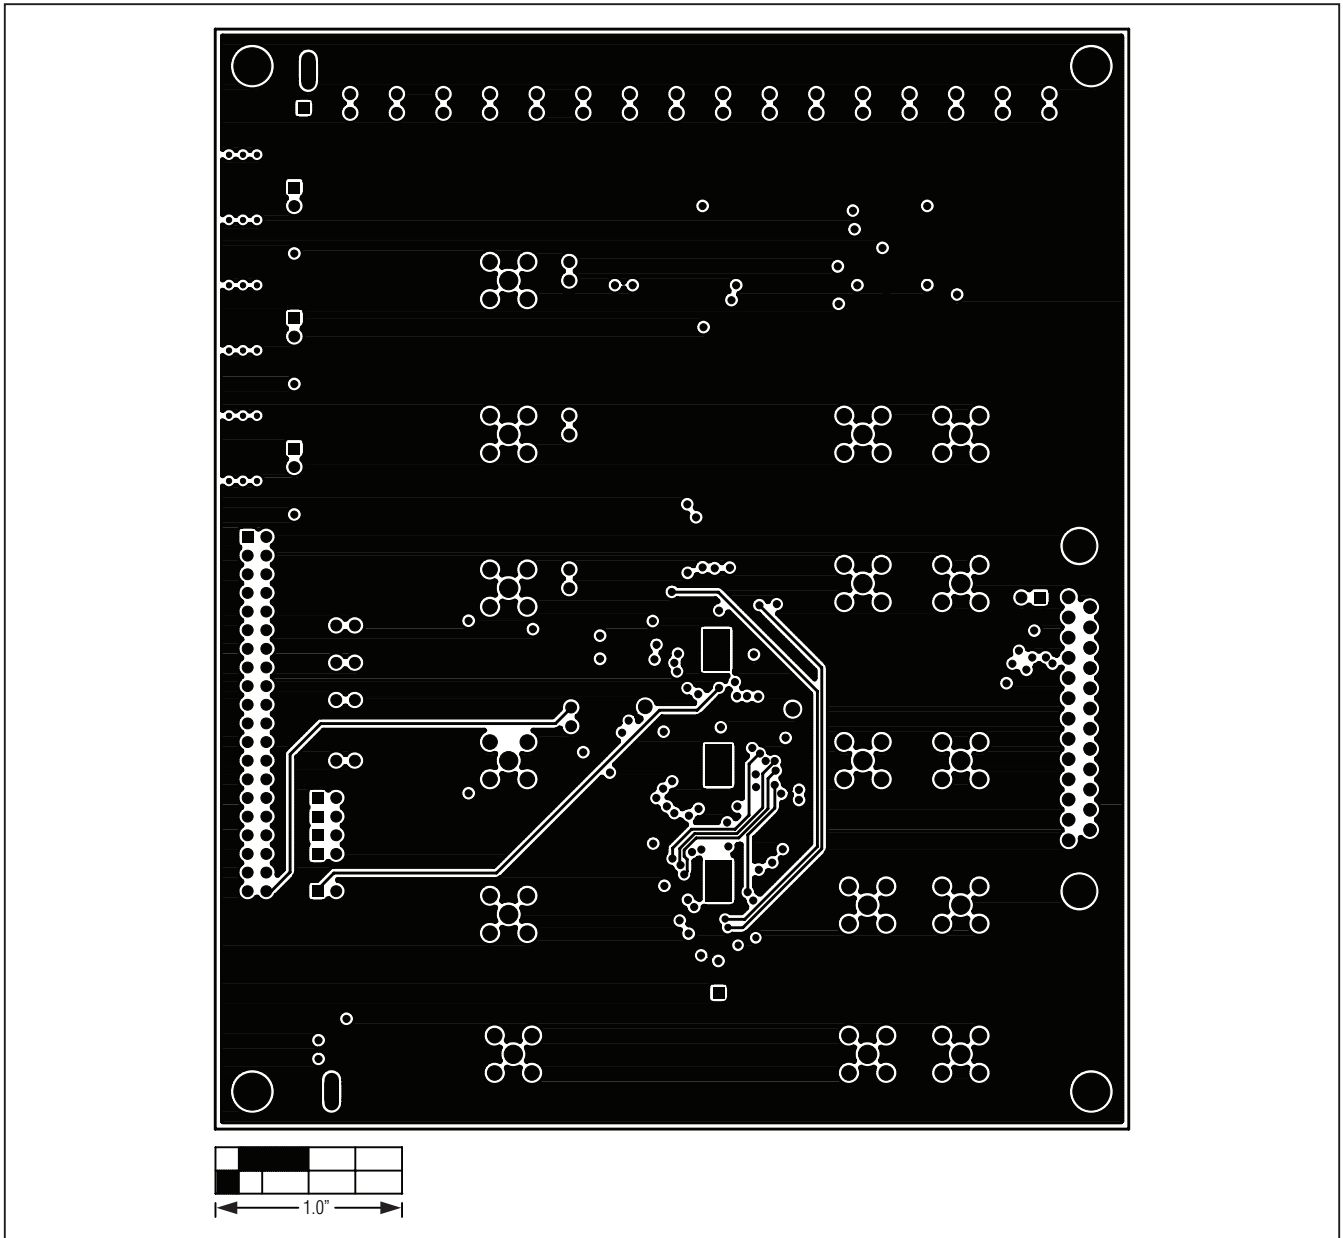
MAX13171E/MAX13173E/MAX13175E EV Kit PCB Layout—Inner Layer 3
